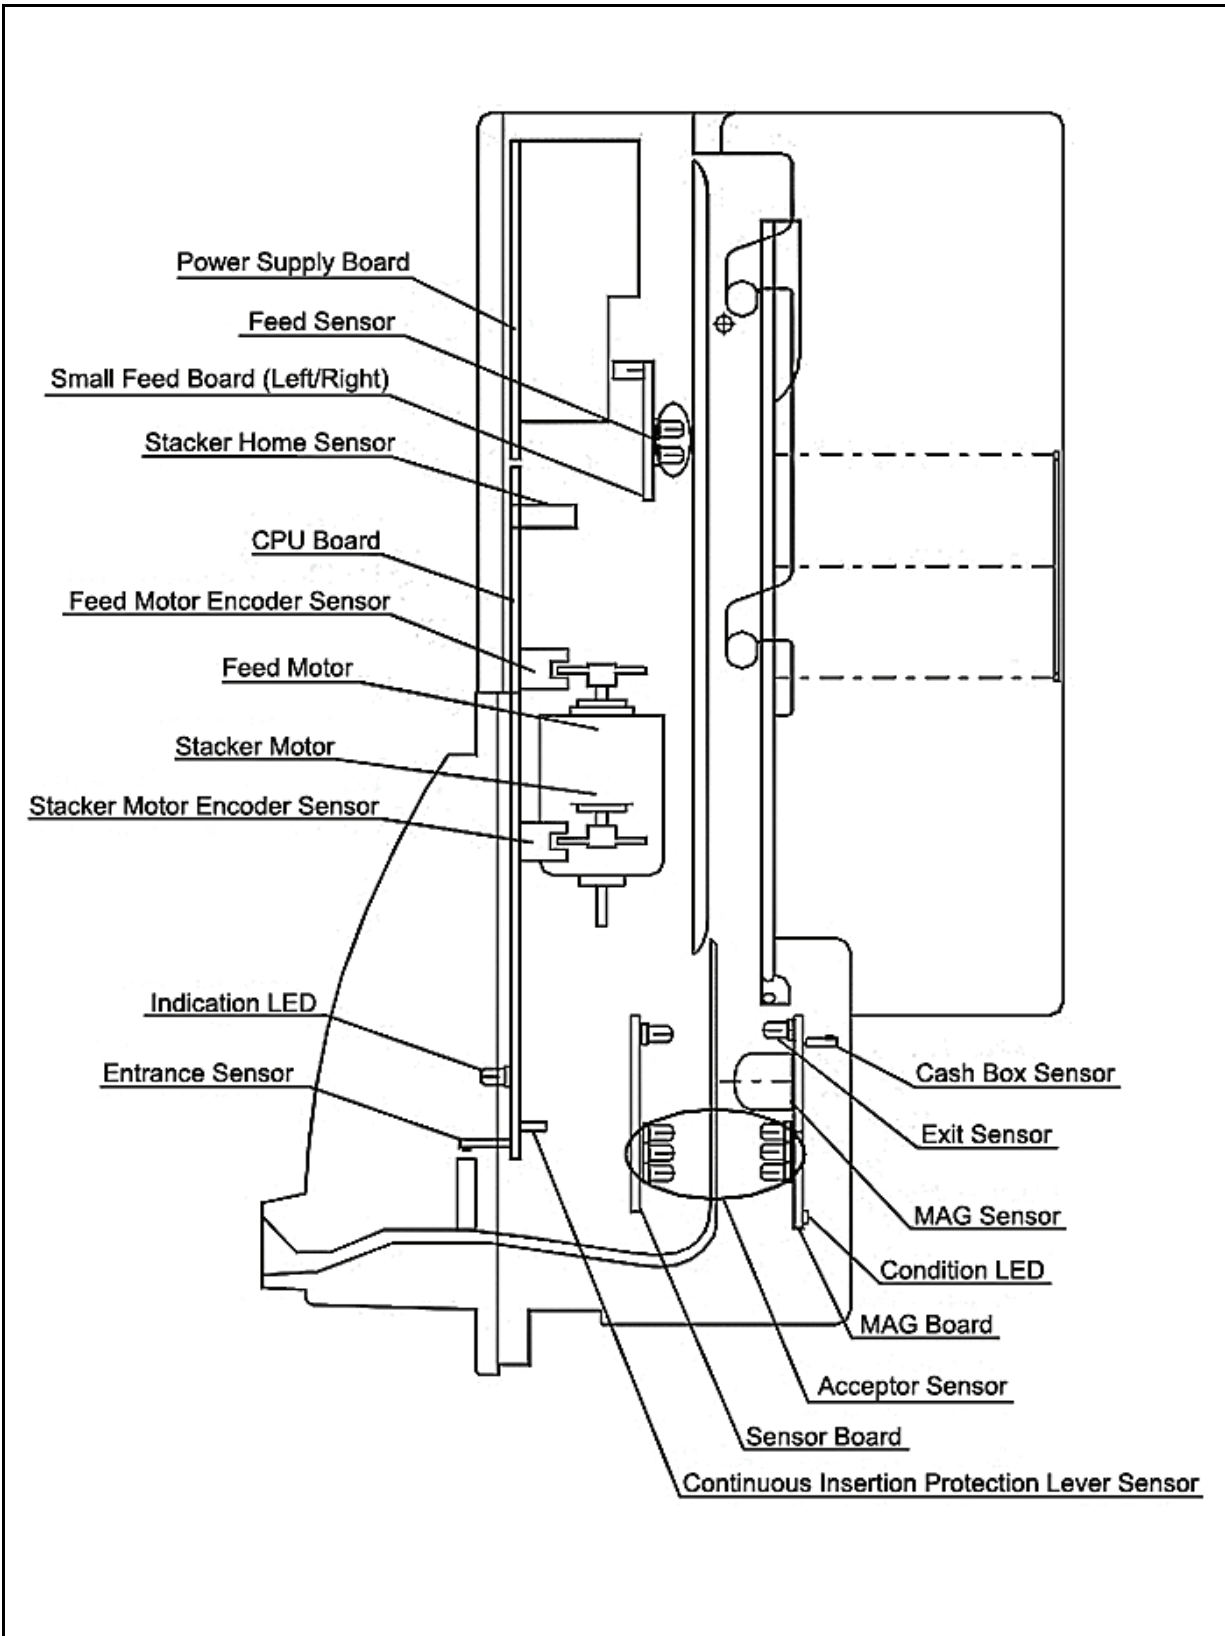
Sensor, Circuit Board and Motor Location Diagram
